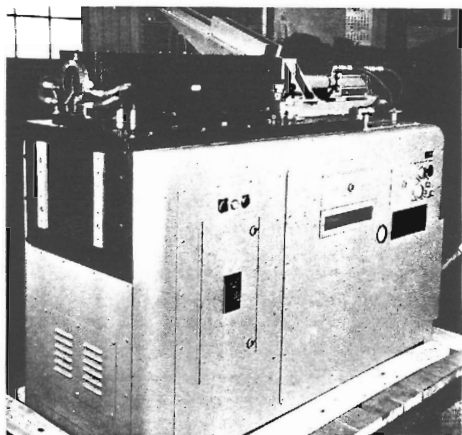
Machine-frequency bar-heating unit for tractor parts.
